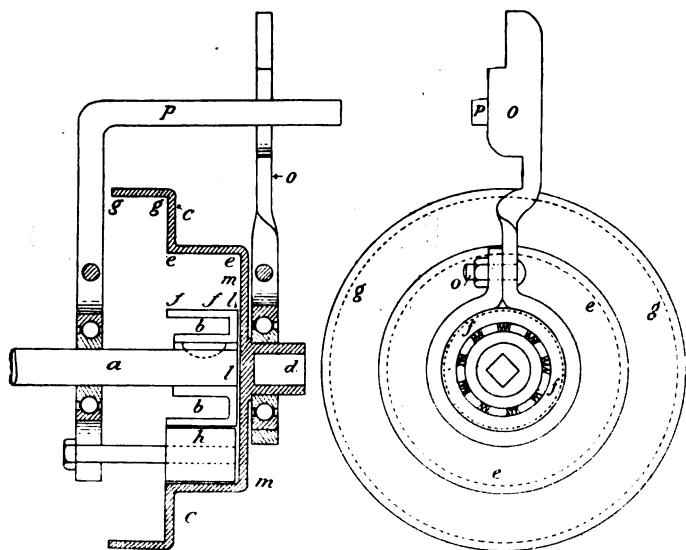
Section and elevation of the Miller friction change-speed gear.
